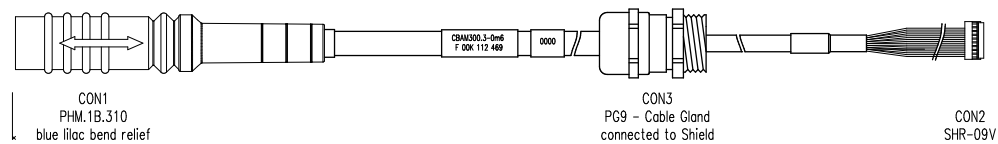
CBAM300.3 Cable - Dimensions
